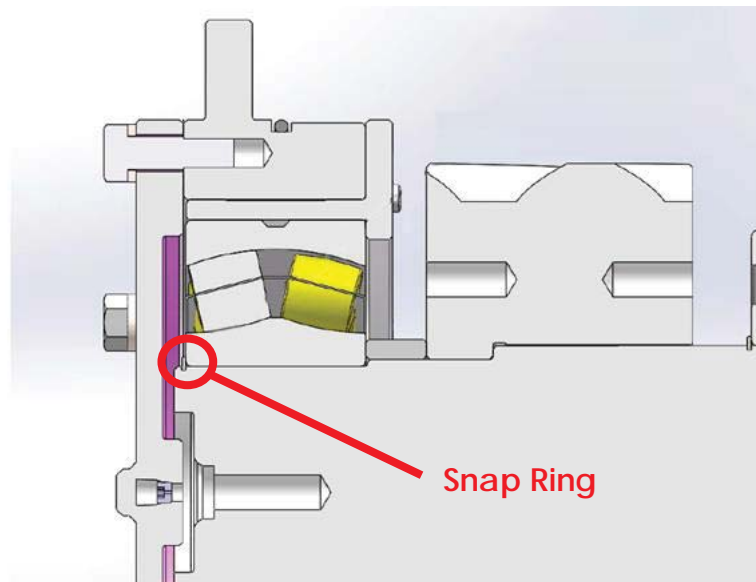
GB Output Shaft Schematic with Seal Detail. Snap Ring indicated.
